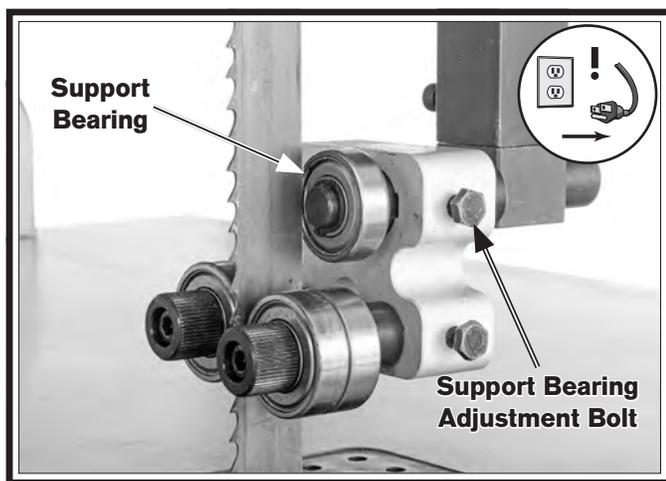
Upper support bearing assembly and controls (guide post cover removed for clarity).
